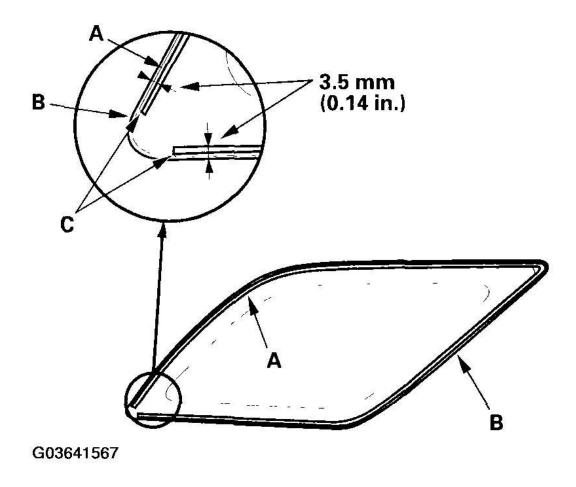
Attaching Rubber Dam With Adhesive Tape A To Inside Surface Of Glass Courtesy of AMERICAN HONDA MOTOR CO., INC.
